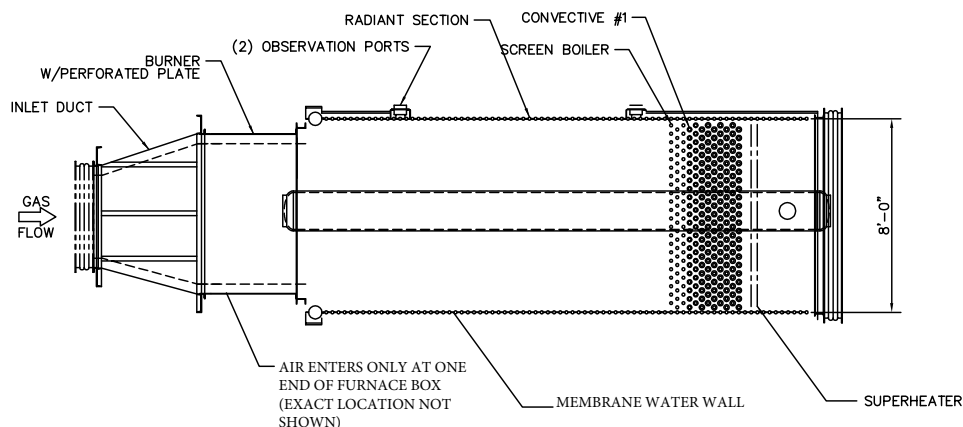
Membrane Water-Wall Furnace with Integrated Boiler (Plan View).
